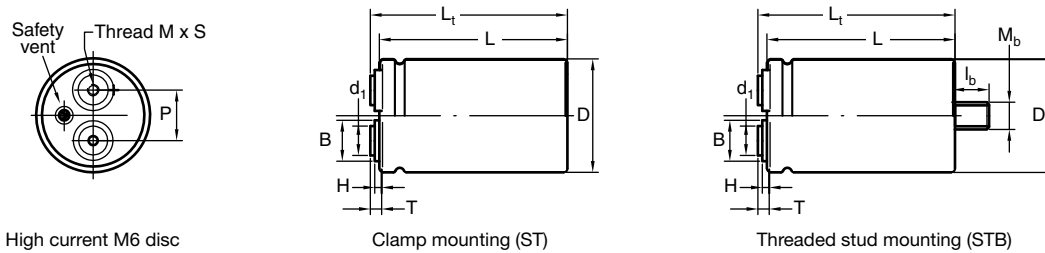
B - Mechanical drawings for high current M6 disc versions.
